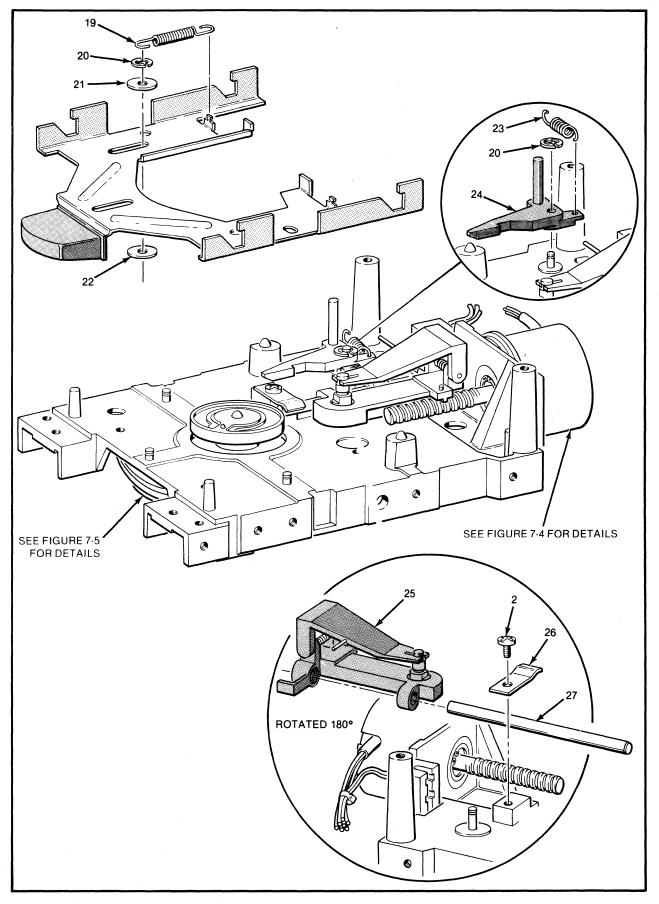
EJECTOR HEAD AND CARRIAGE ASSEMBLY
